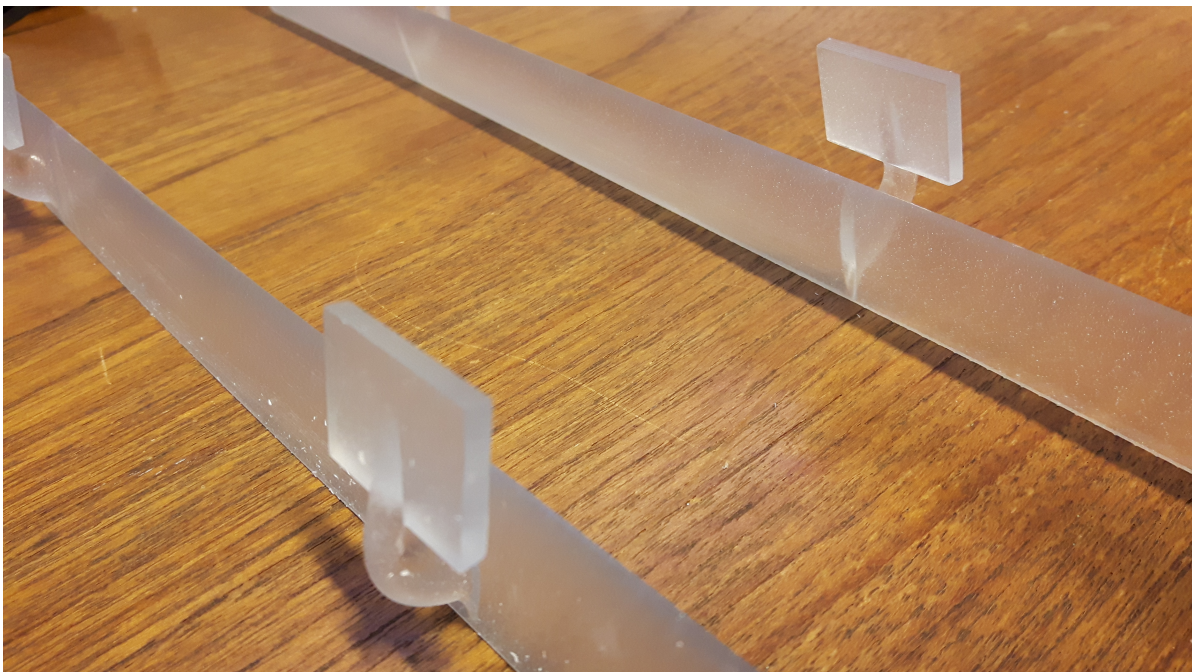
Close-up of the support legs and mounting plates on two 3D-printed guide vanes
